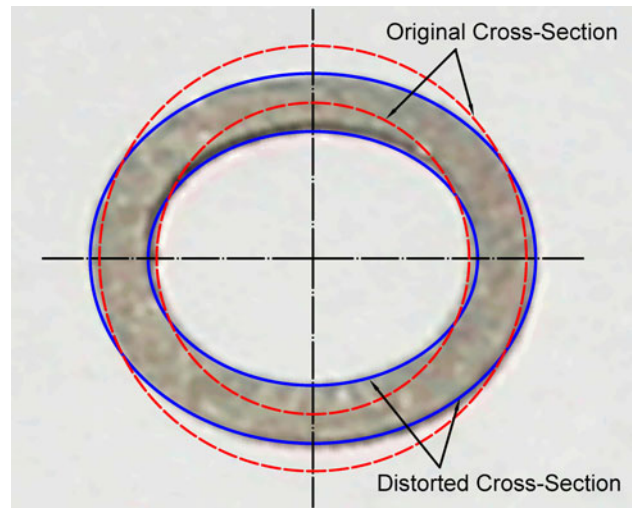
Cross section after bending deformation. (a) Photograph of a distorted cross section. The bent tube was cut utilizing a wire cutting machine. (b) Geometry of an elliptical cross section
